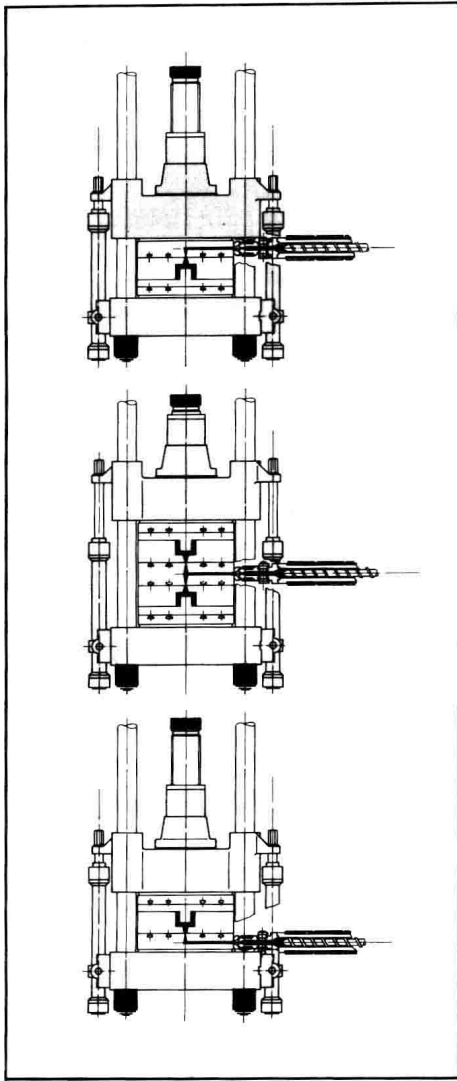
Using a heating plate with integrated cold runner nozzle (side inject, centre exit nozzle injection into the top or bottom centre of a mould is possible. Or using a cold runner block with nozzles up and down, for injection into 2 article decks
